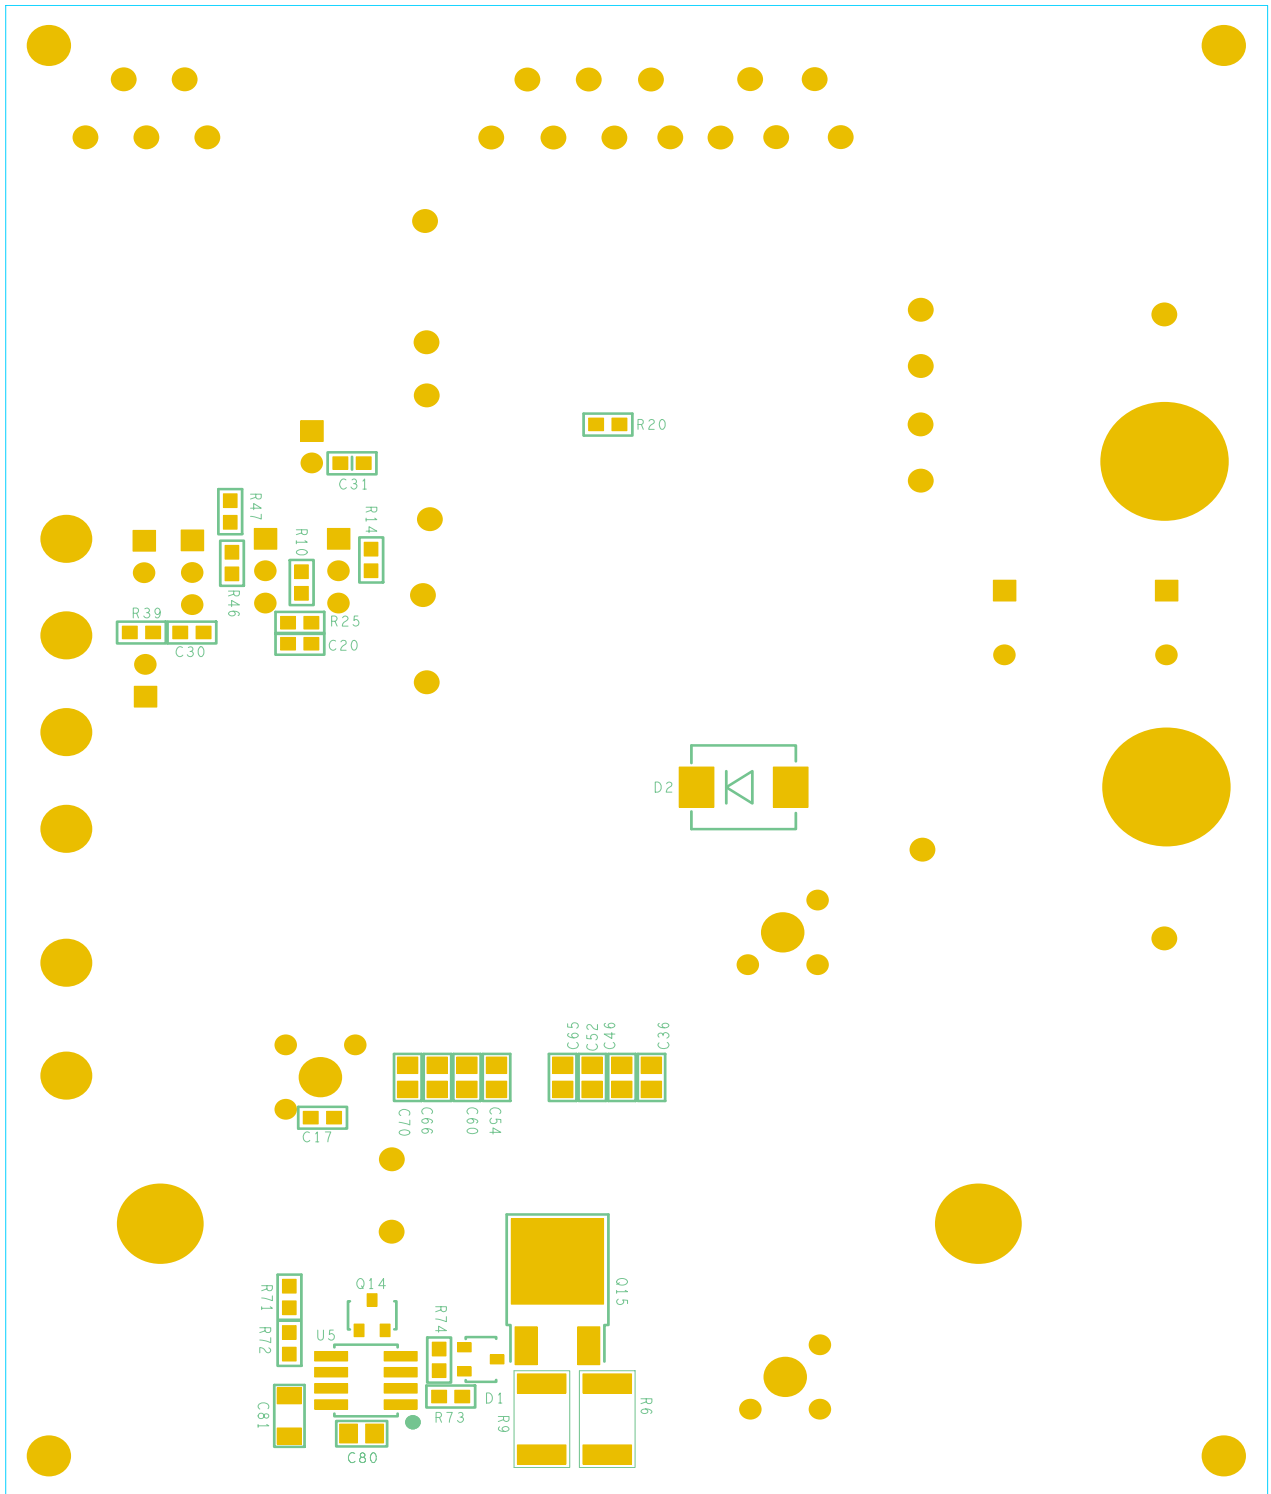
ISL6263CEVAL1/1Z and ISL6263DEVAL1Z EVALUATION BOARDS PCB BOTTOM SILKSCREEN
